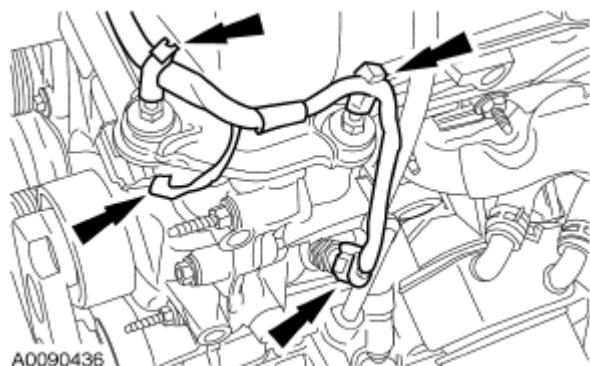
Locating Camshaft Position Sensor (CMP) Connectors
